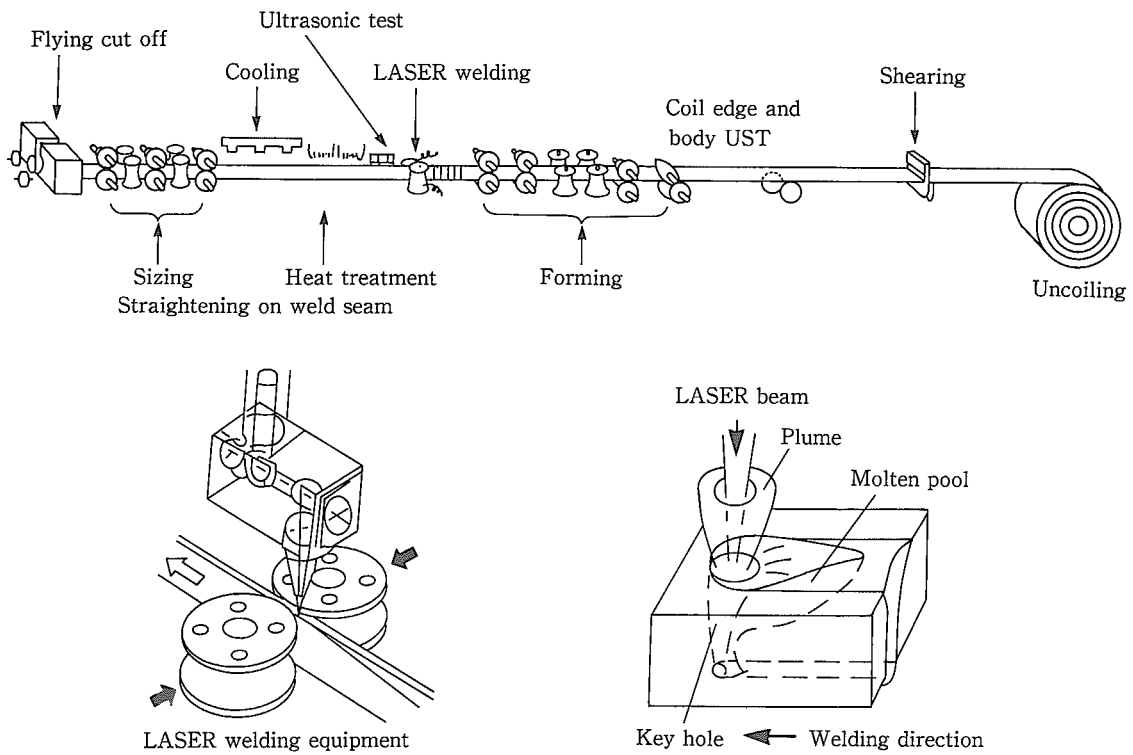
Manufacturing process of LASER welded pipe
